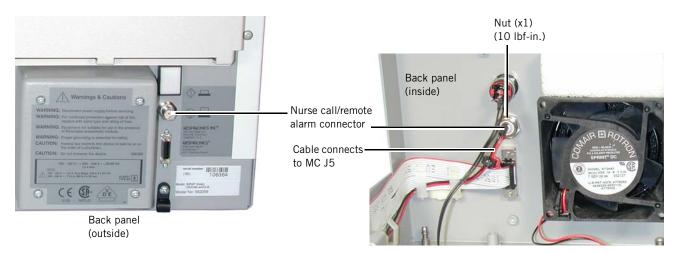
Removing the Nurse Call/Remote Alarm Connector
